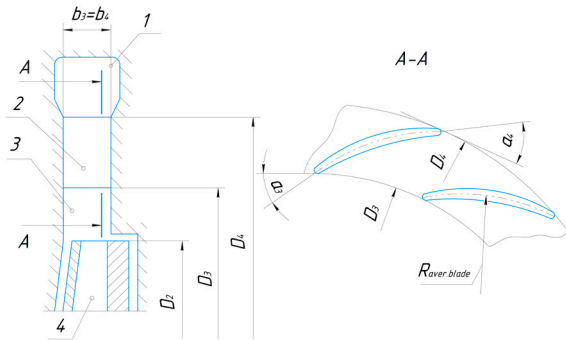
Cooling gas discharge scheme with a blade diffuser:
